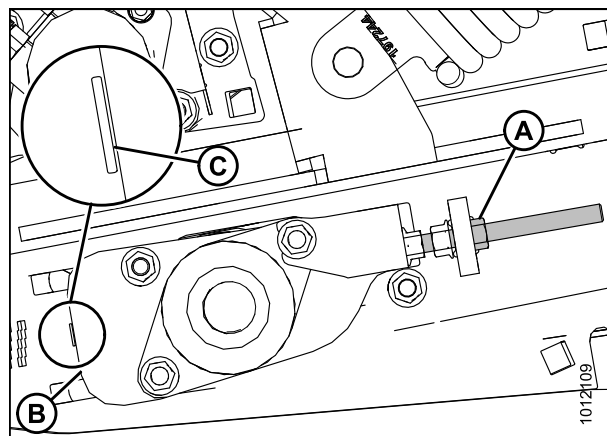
Left Side Rear Deck Shown—Right Side Opposite
